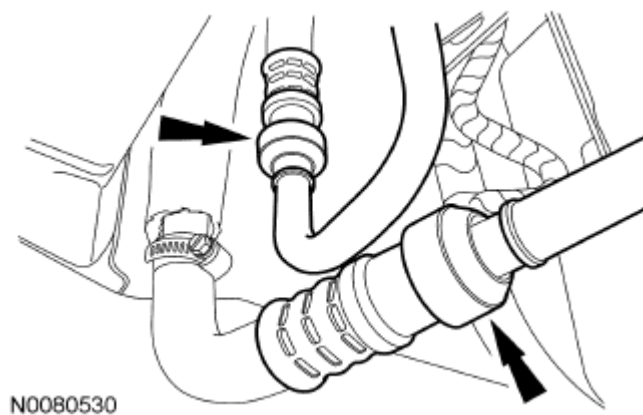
Locating Transaxle Fluid Cooler Tubes
